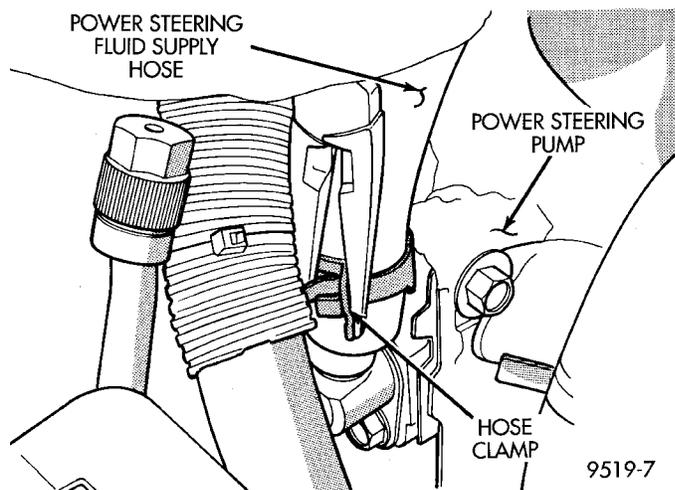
Power Steering Fluid Supply Hose At Power Steering Pump
